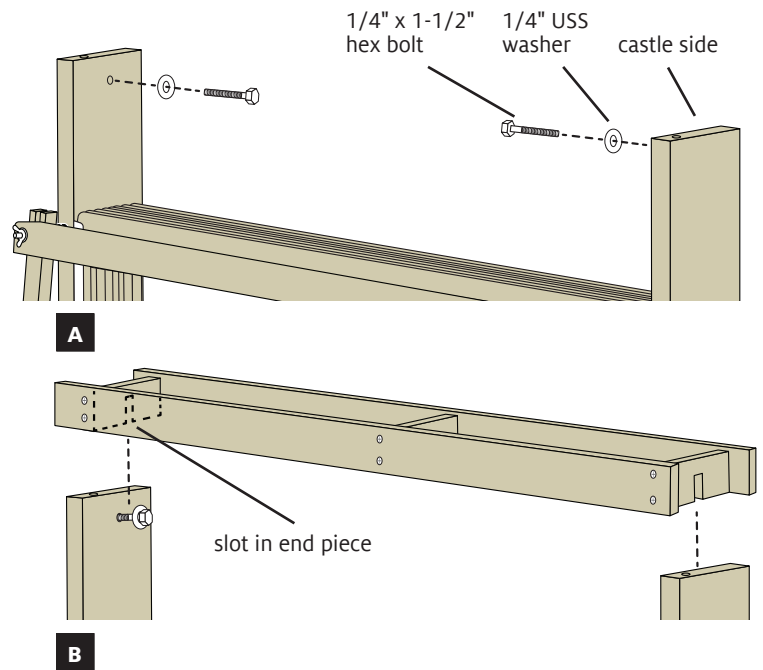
INSTALL THE HIGH CASTLE ACCESSORY TRAY (HIGH CASTLE LOOMS)
